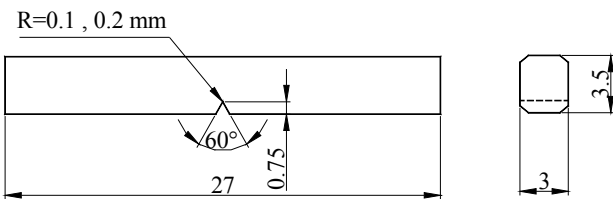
Geometry and dimension of subsize Charpy specimens in Zr- BAM
